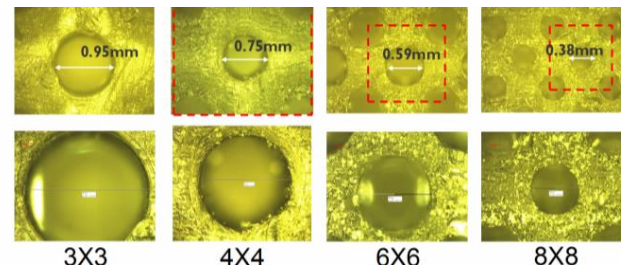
Diameter measurements of the inlet nozzles in the printed coolers. The red dashed box indicated the unit cell.
